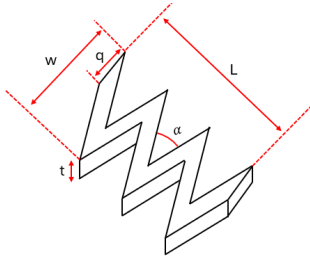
Schematic drawing of the zigzag strip dimensions and location
